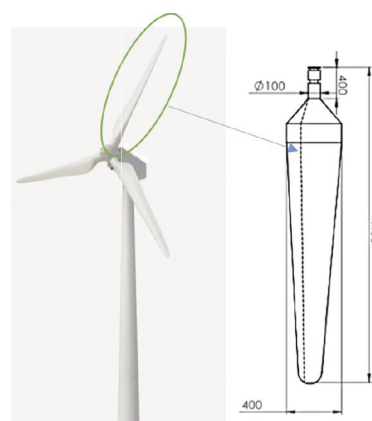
The blade's dimensions (all dimensions in millimeter)
